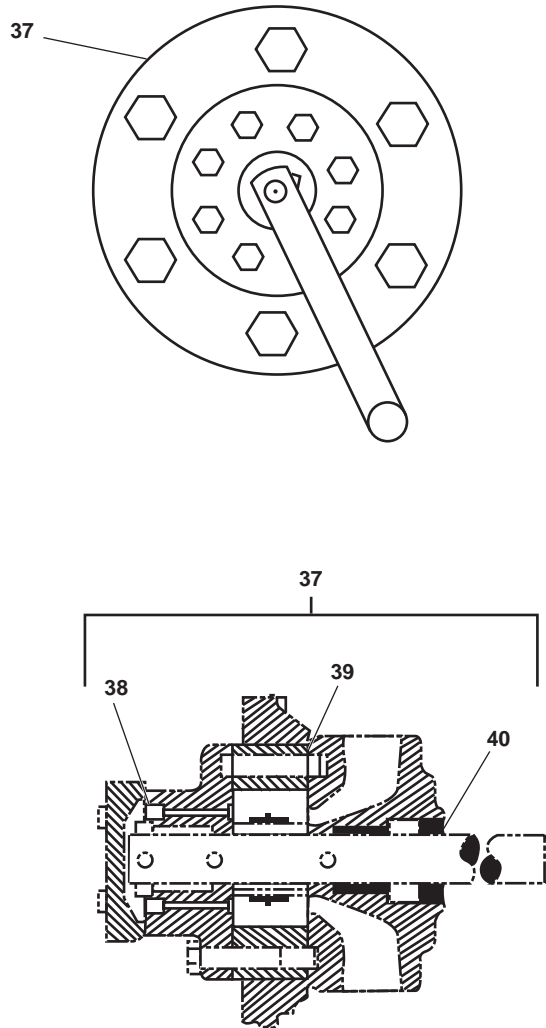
Hydraulic Watertight Doors (Sheet 8 of 9)
